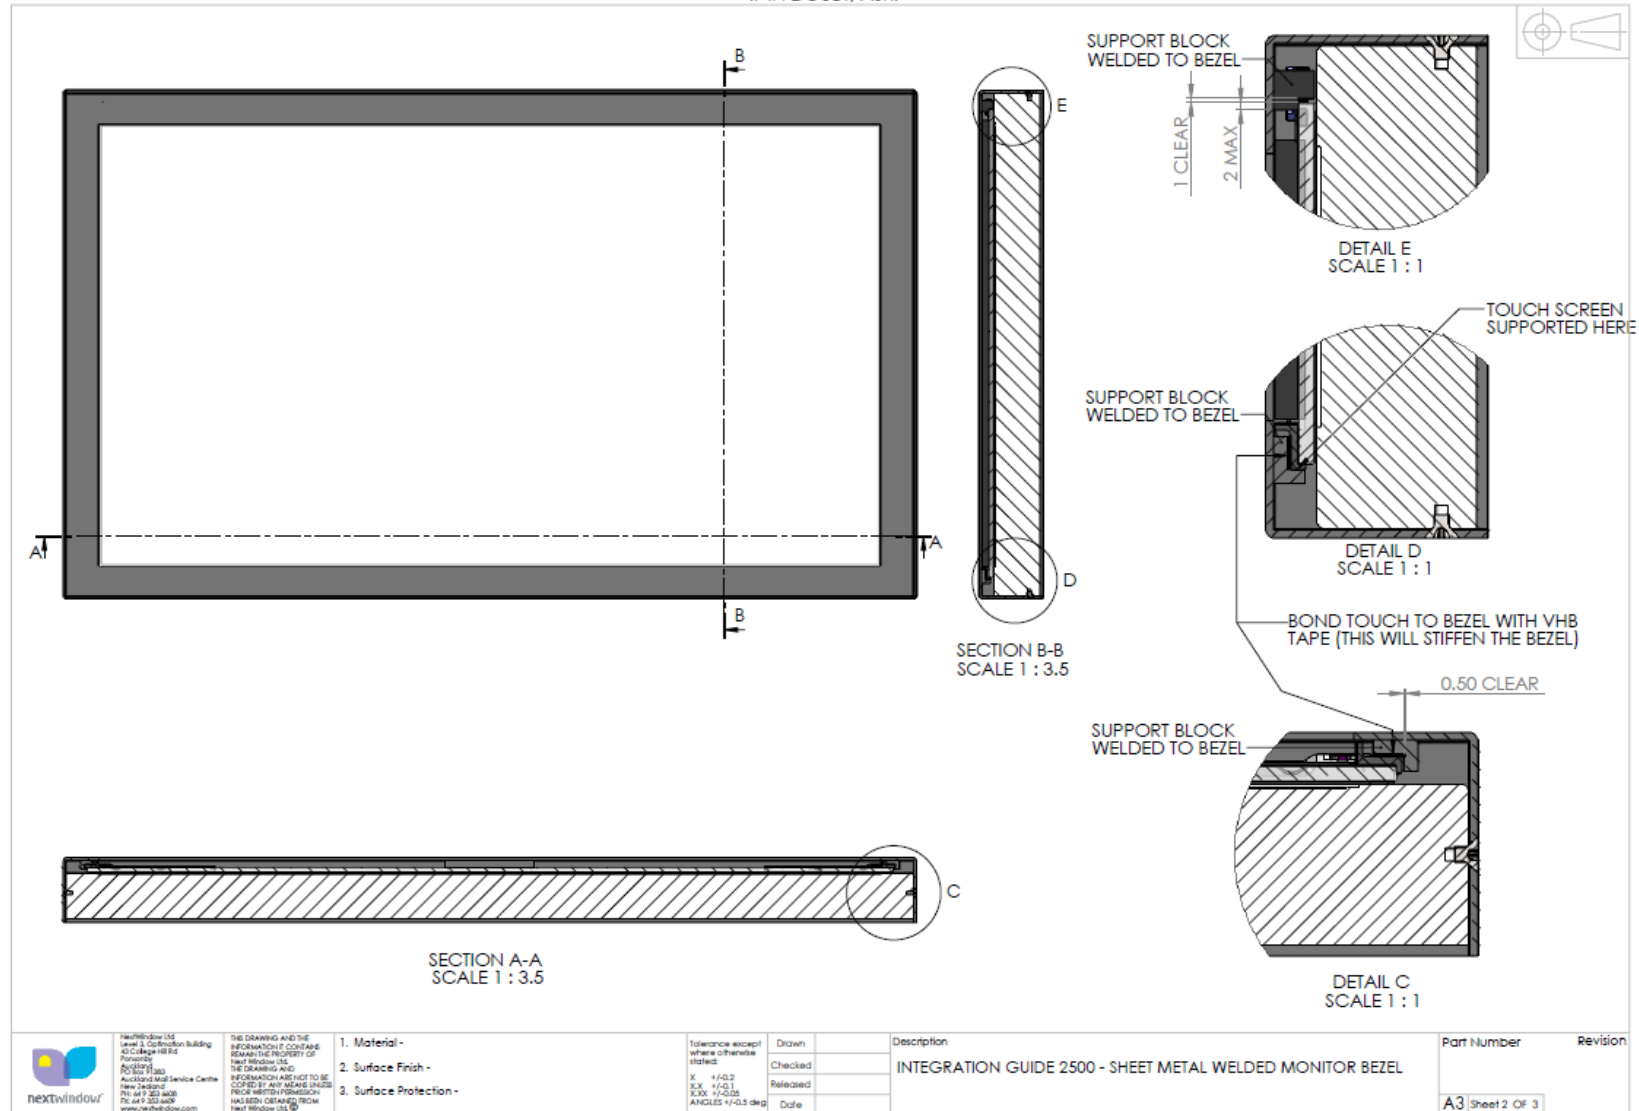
Detail of sheet metal welded monitor bezel showing integrated cross-sections.
